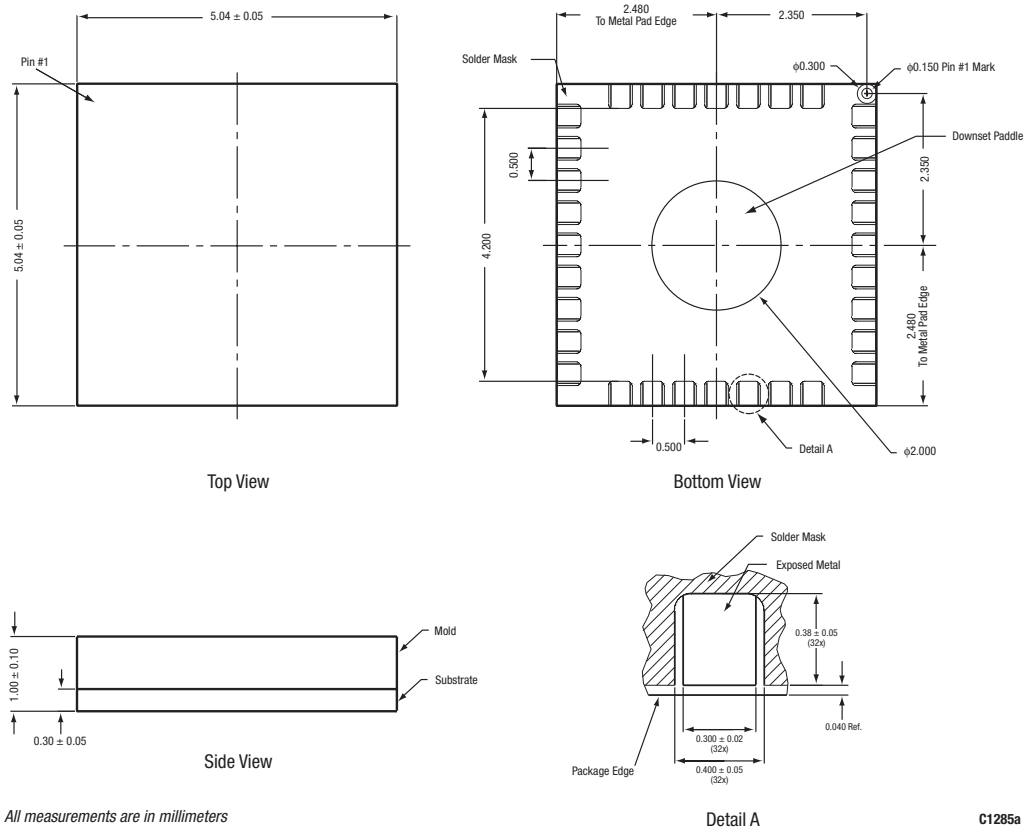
SKY73009 32-Pin RFLGA Package Dimensions
